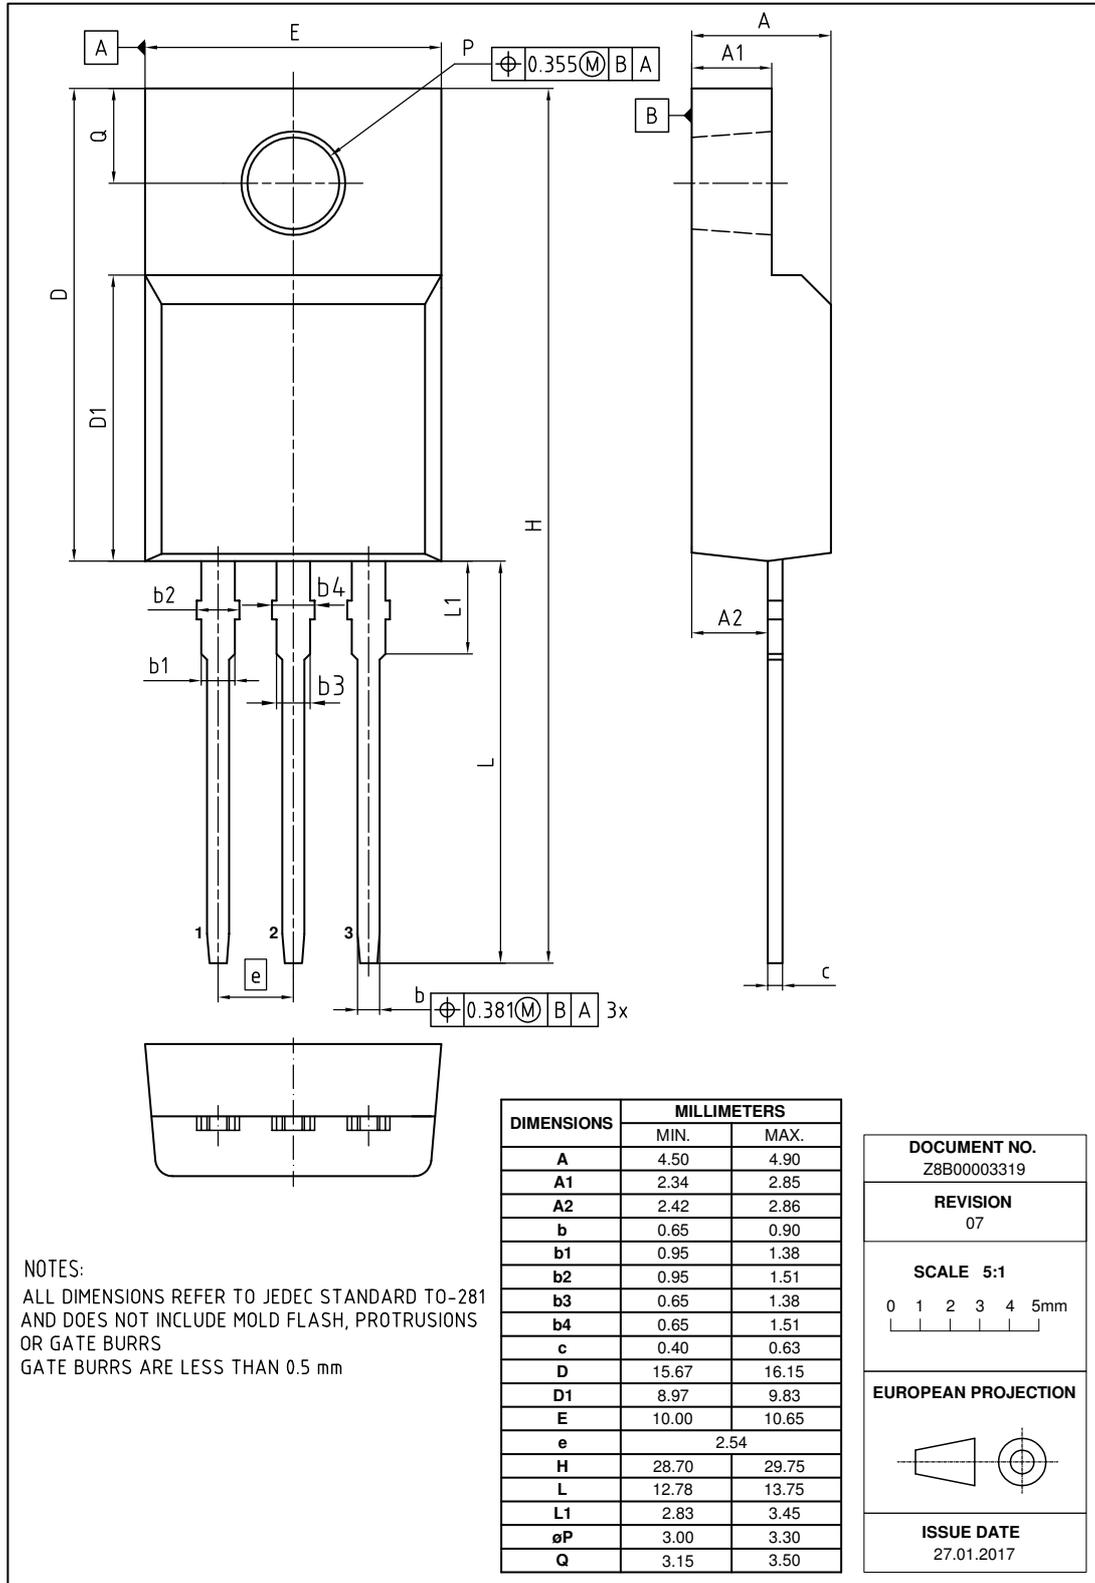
Outline PG-TO-220 FullPAK dimensions in mm
